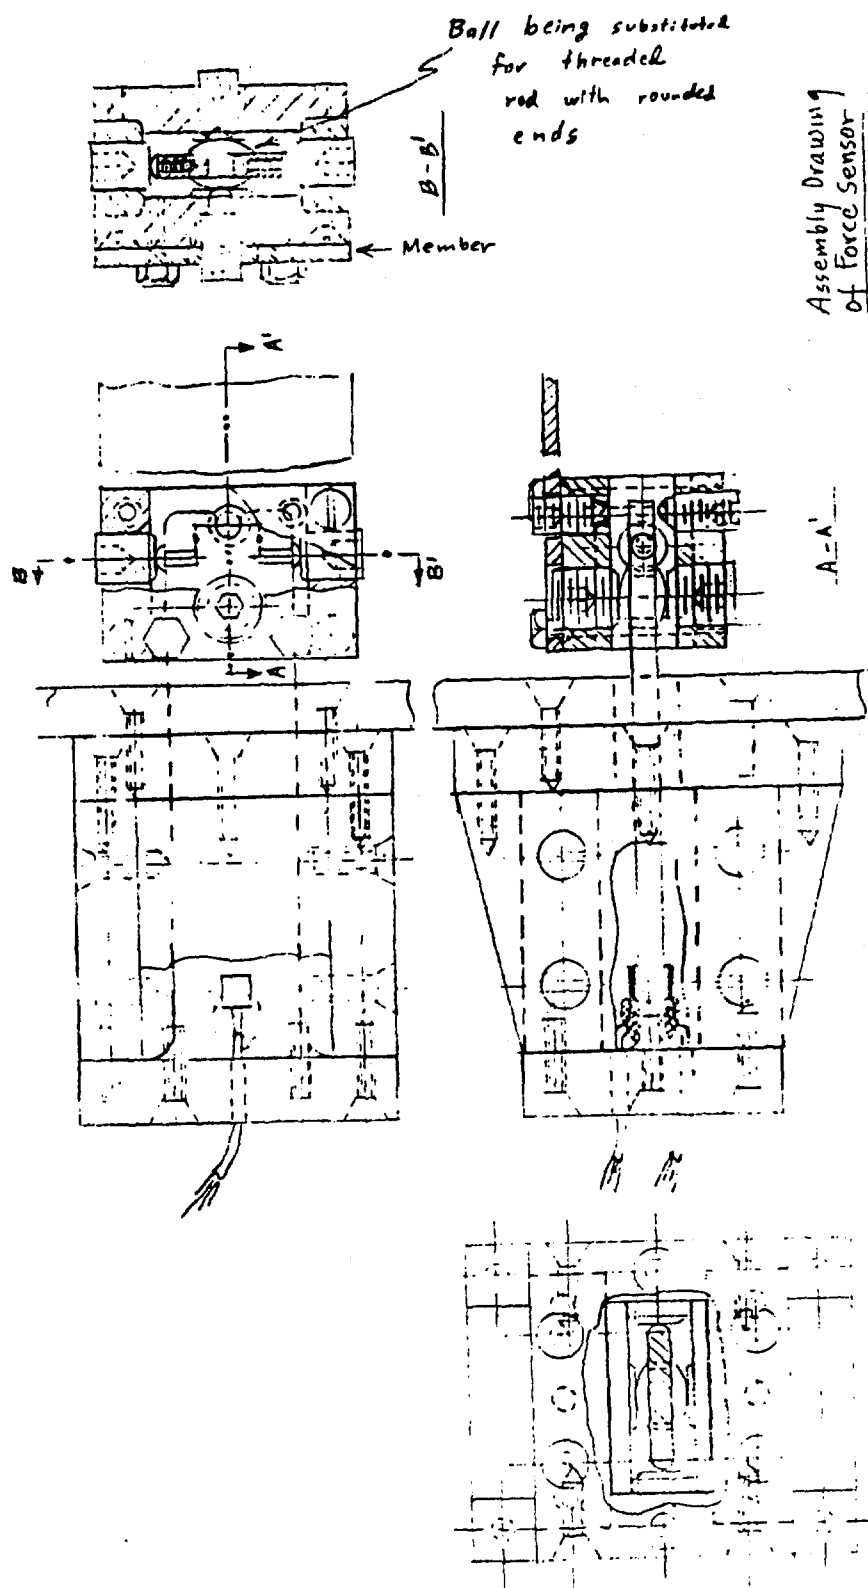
Assembly Drawing of Force Gage Support Housing,
